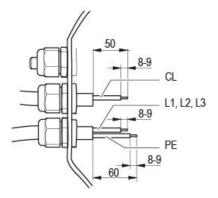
Recommended stripping lengths in mm (inside the terminal box) Legend: CL = control lines
